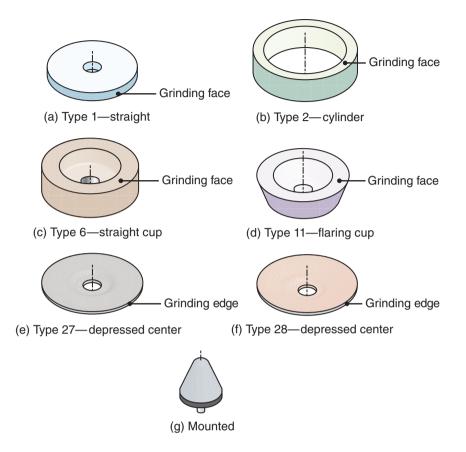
Common types of grinding wheels made with conventional abrasives. Note that each wheel has a specific *grinding face*; grinding on other surfaces is improper and unsafe.
